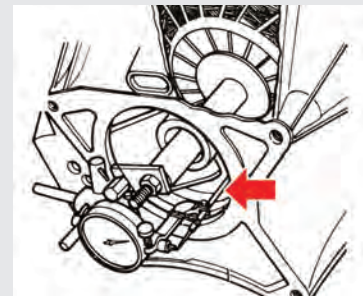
Level tip rides on bore surface. This surface must be clean and free of nicks, burrs or foreign material.
